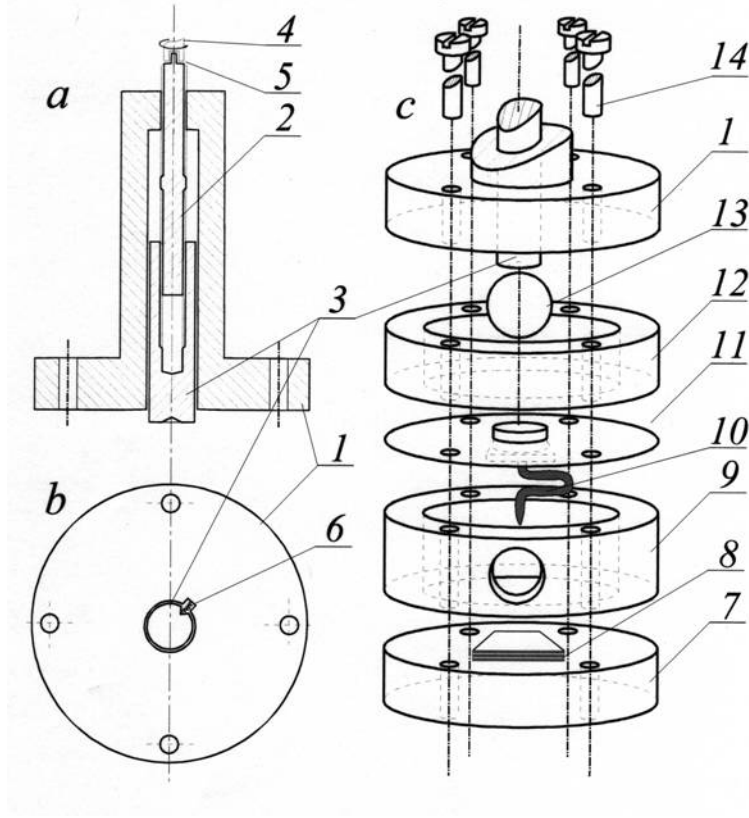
The mechanical components of the point contact setup. a) Side view of differential screw mechanism. b) Top view of differential screw and block. c) An exploded view of a block, including the tip (10) and a sample (8). See text for detail.
